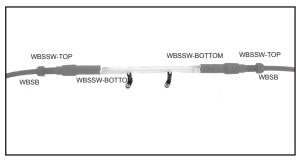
Final assembly of the WBSSW wetbits short sleeve wide
